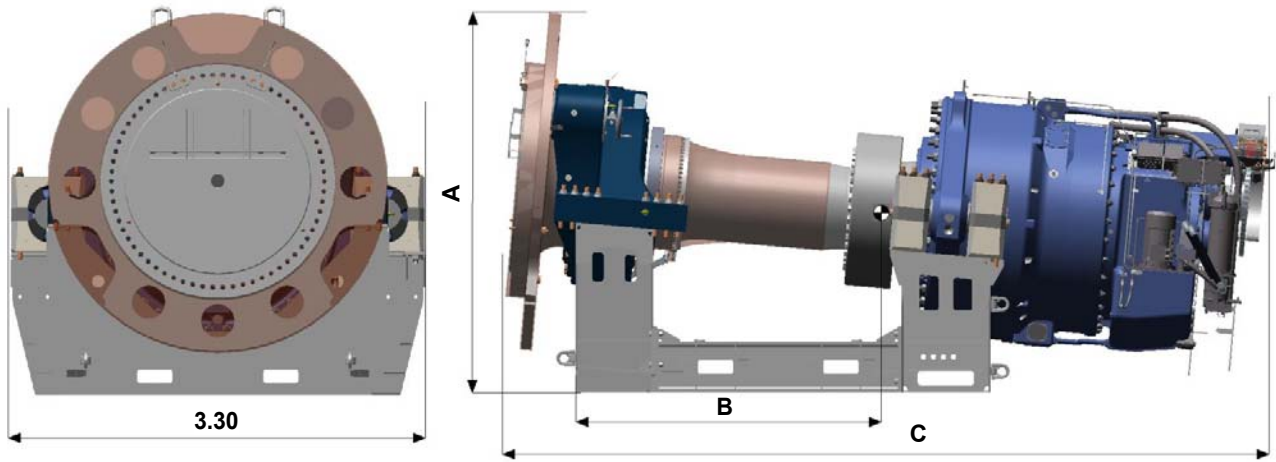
Dimensions of the drive train on the transport frame (all dimensions in m)
